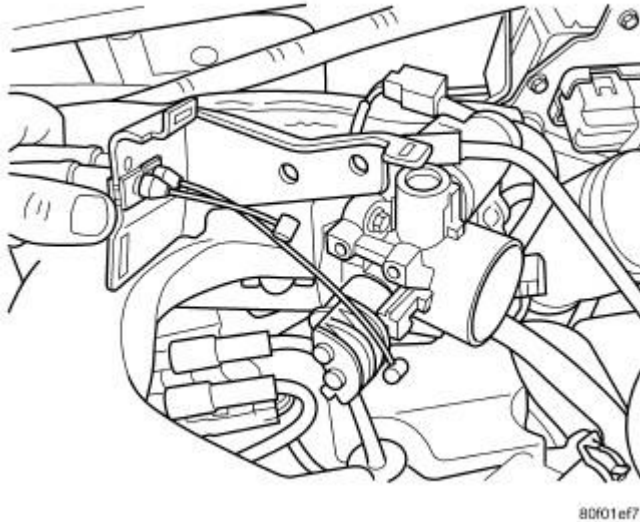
Throttle Cable Bracket - 2.4L Turbo
